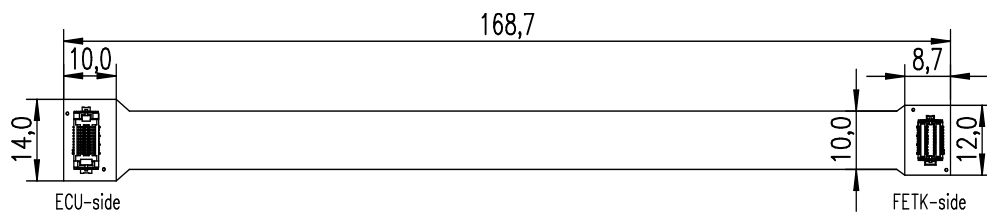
ECU Adapter ETAM4 (Bottom View)
